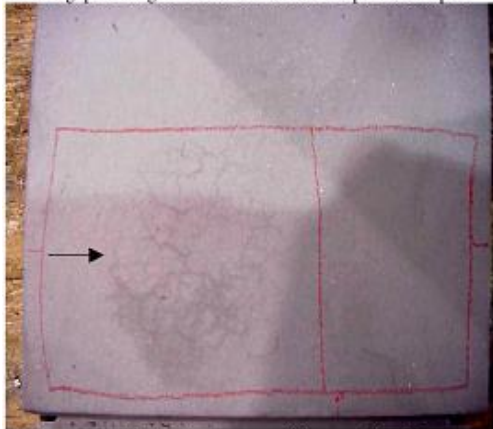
Typical craze cracking on the Siemens V84.2, Row 2 vane.
